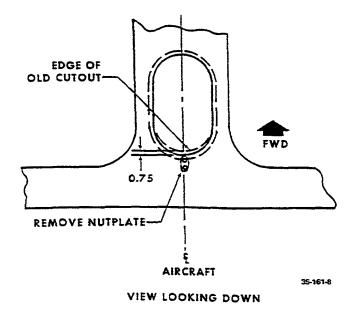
R. Flap Motor Access Hole Modification (When Making Initial Installation of 35-380109 Flap Motor) (Effectivity: D-839 thru D-8872)
